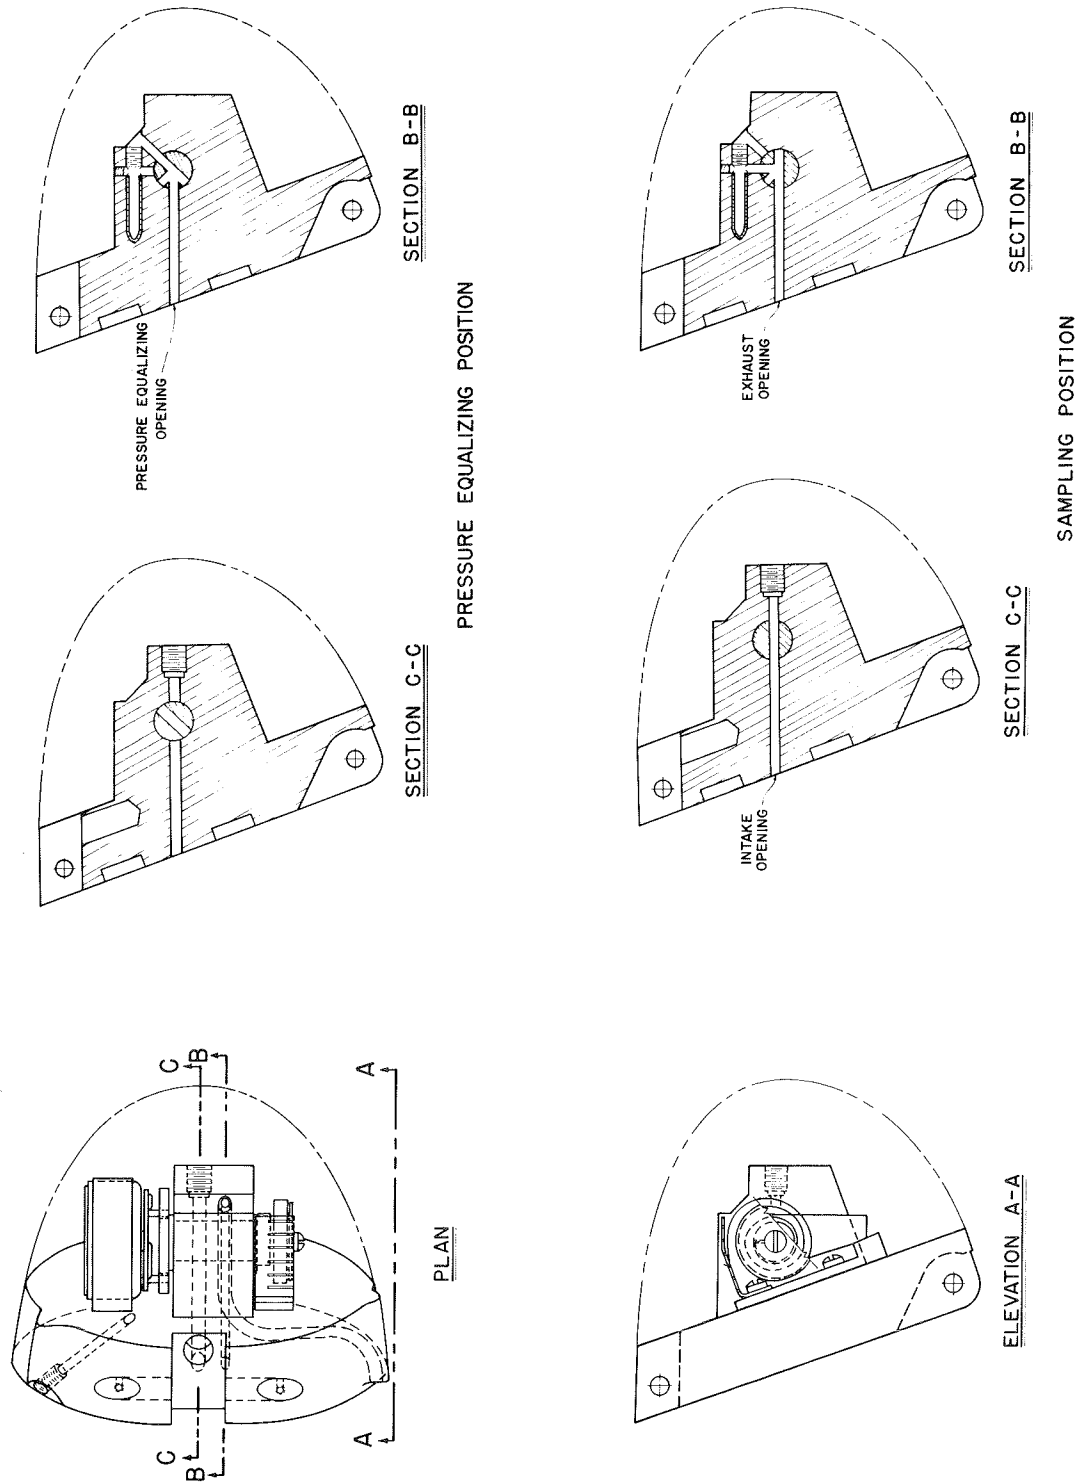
POINT-INTEGRATING SAMPLER, US P-61, VALVE MECHANISM
